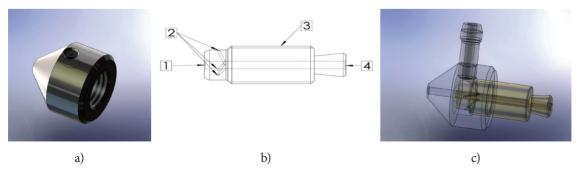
Nozzle (a) housing, (b) body and (c) assembly
